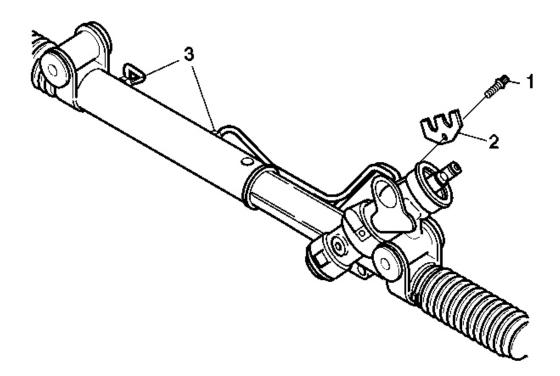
Identifying Steering Gear Cylinder Pipe Retaining Plate Courtesy of GENERAL MOTORS CORP.
